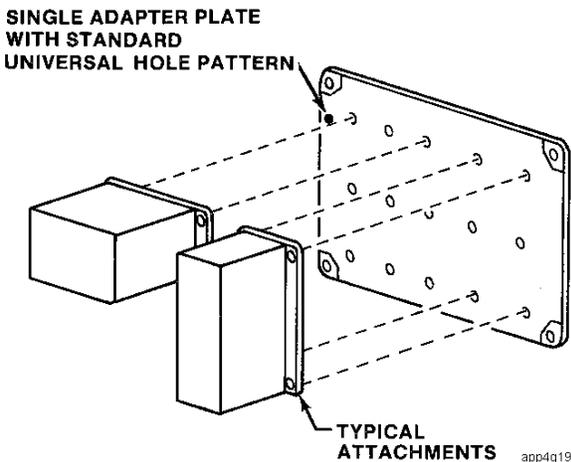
Stowage and mounting provision - single adapter plate.
